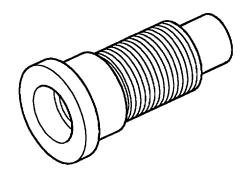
Setting Up to Machine I.D. of Bushing or Lug at Location 2, Y470.500 (Sheet 1)
